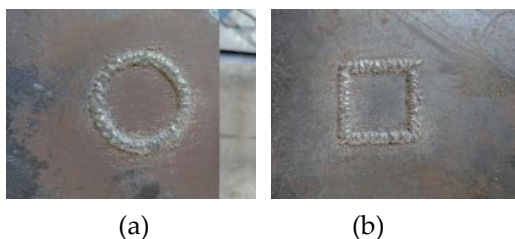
illustrates the results of two different types of welding performed by the automatic welding machine. Image (a) shows a
